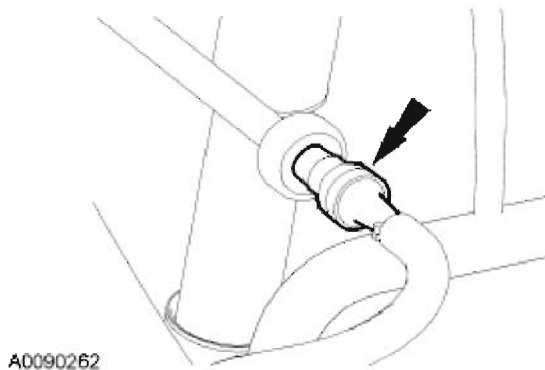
Locating Vacuum Supply Tube & Position Aside
